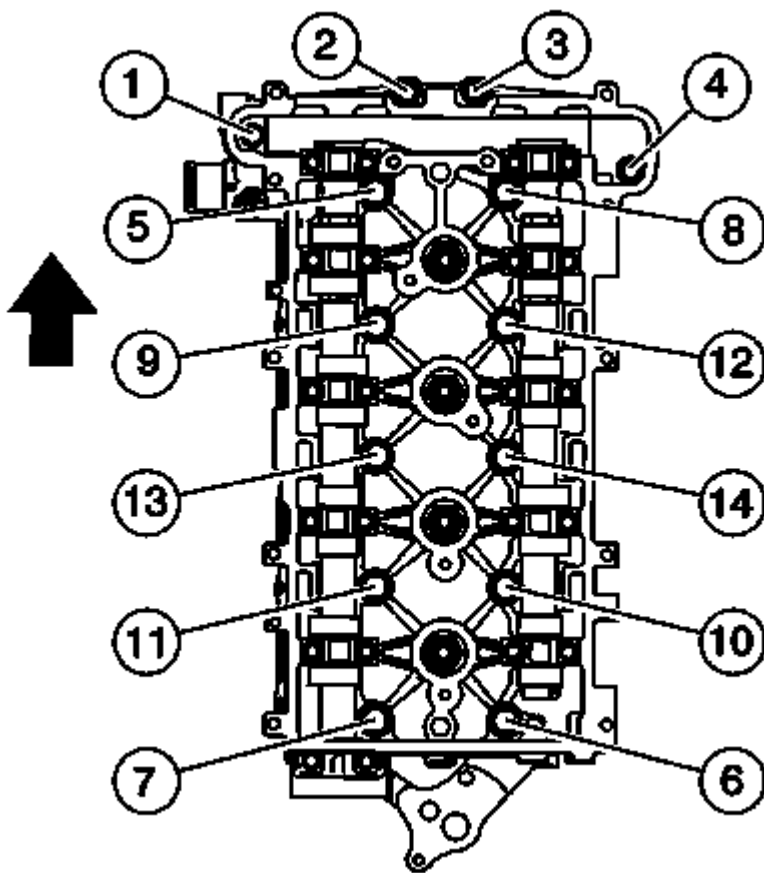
Identifying Cylinder Head Bolt Removal Sequence
